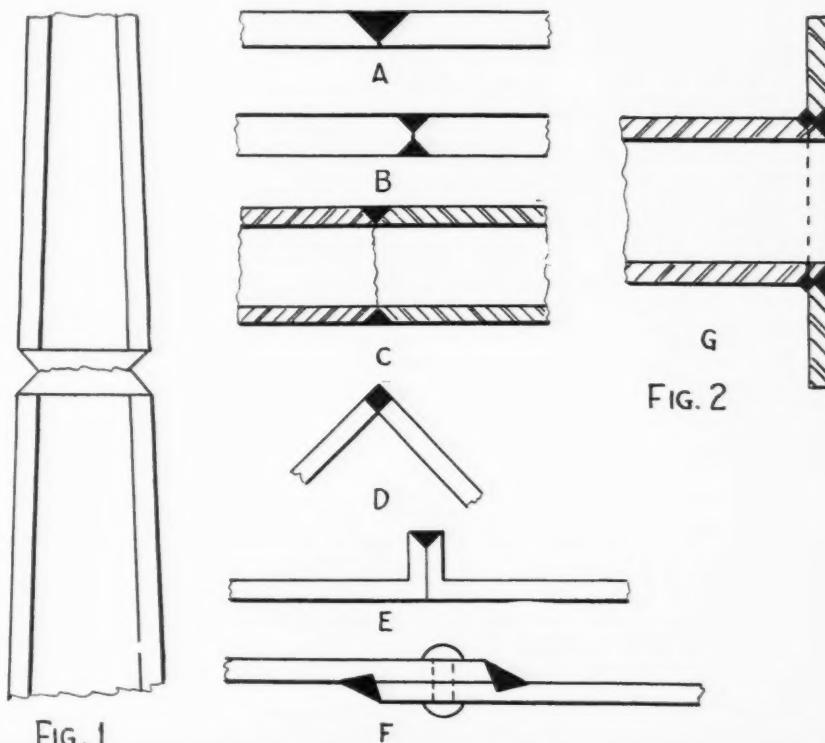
Gear Shift lever ready to be welded. Fig. 2. Illustrating various set-ups of welding forms. See text
